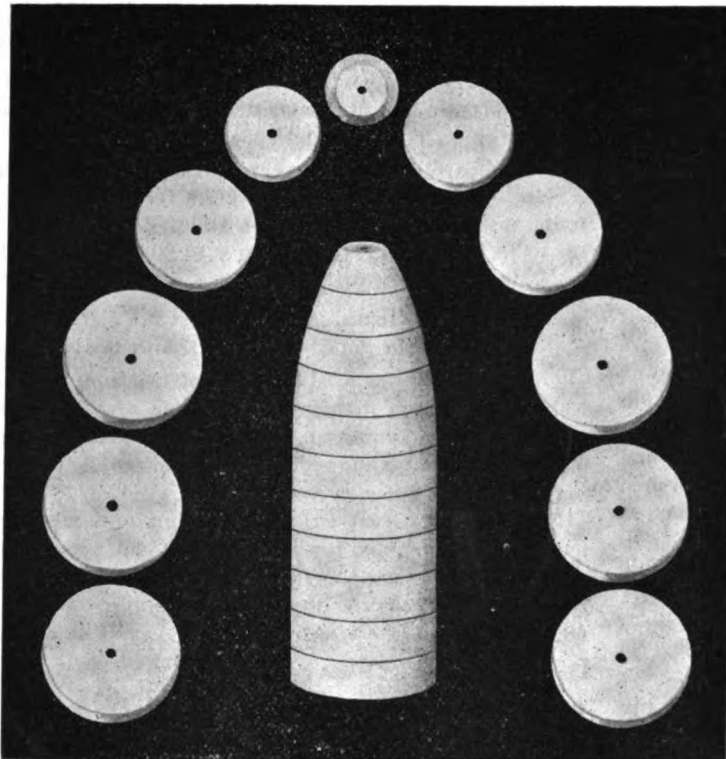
Illustration of a Guncotton Bursting Charge for an 8-inch Deck-piercing Shell, built up in separate discs and turned in lathe to shape—the component discs being shown around an assembled charge.
